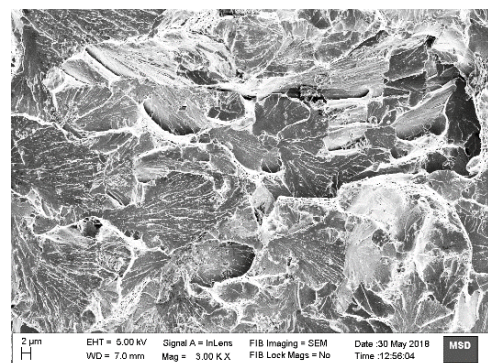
Enlarged view of region 3, showing trans-granular cleavage – brittle fracture
